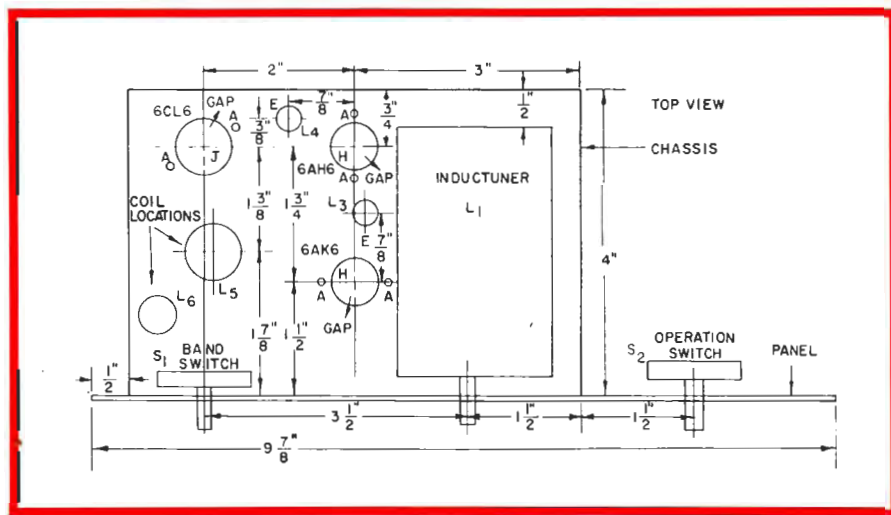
CHASSIS LAYOUT DIAGRAM for the inductive-tuned VFO exciter. Locations for coils L_3 and L_4 are also shown. Holes marked "A" are No. 31 drill for No. 4 machine screws; those marked "E" are $\frac{3}{32}$ of an inch in diameter for the mounting studs on L_3 and L_4 .
